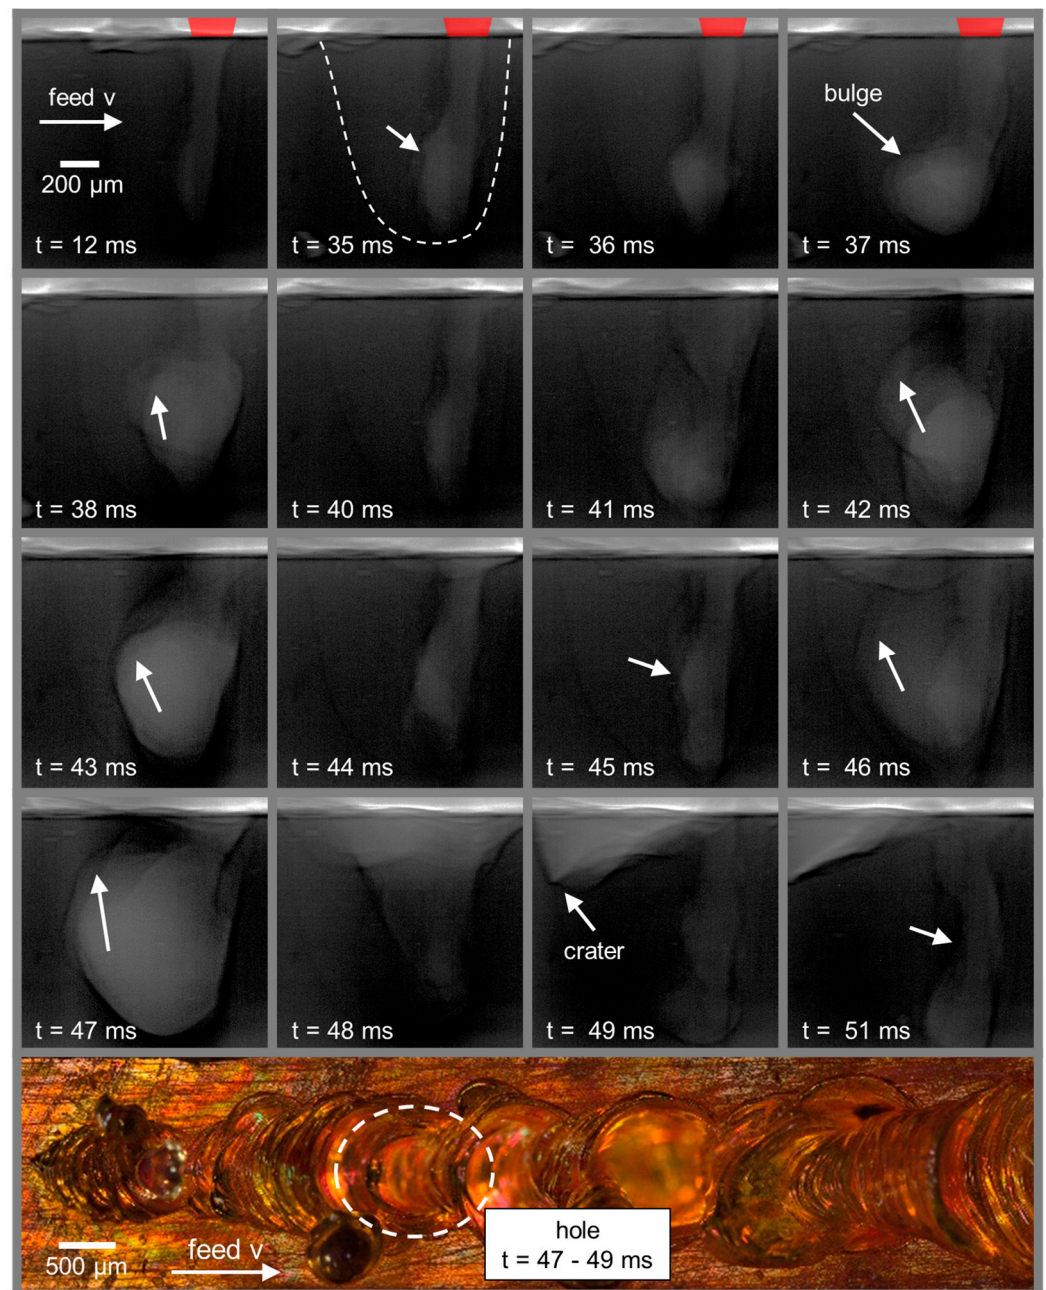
(Upper) X-ray video sequence of laser beam welding of copper using 1030 nm laser radiation, $P = 2500$ W, $v = 66.7$ mm/s; (lower) corresponding top view of the weld seam.
